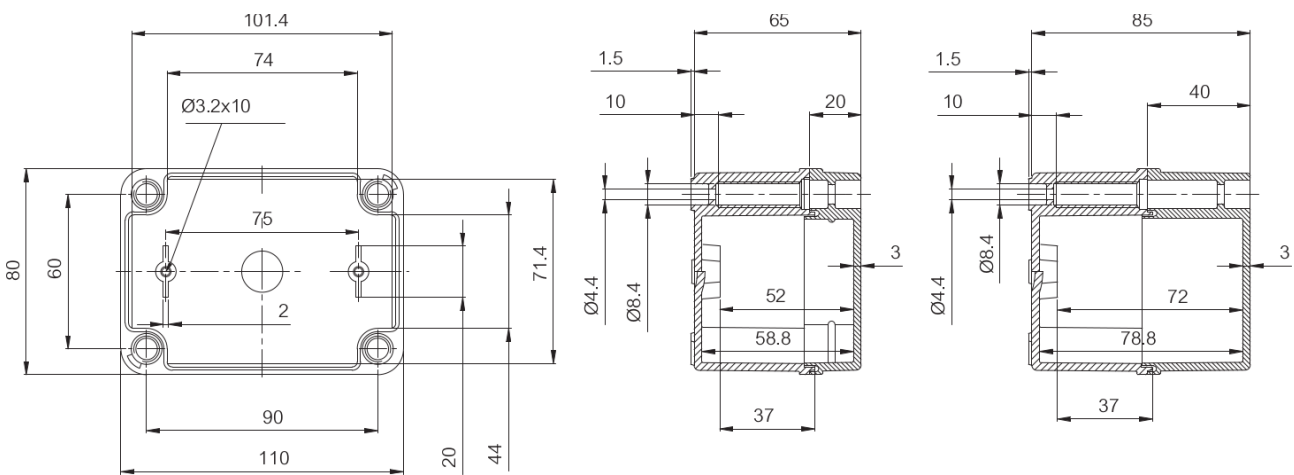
Housing dimensions. Note: Drawing not including cable gland. Dimensions in mm.
